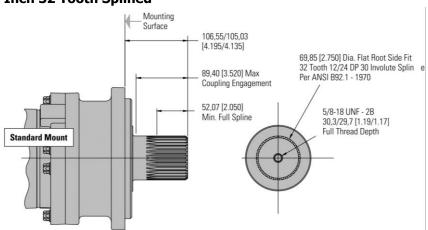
2–3/4 Inch 32 Tooth Splined shaft
